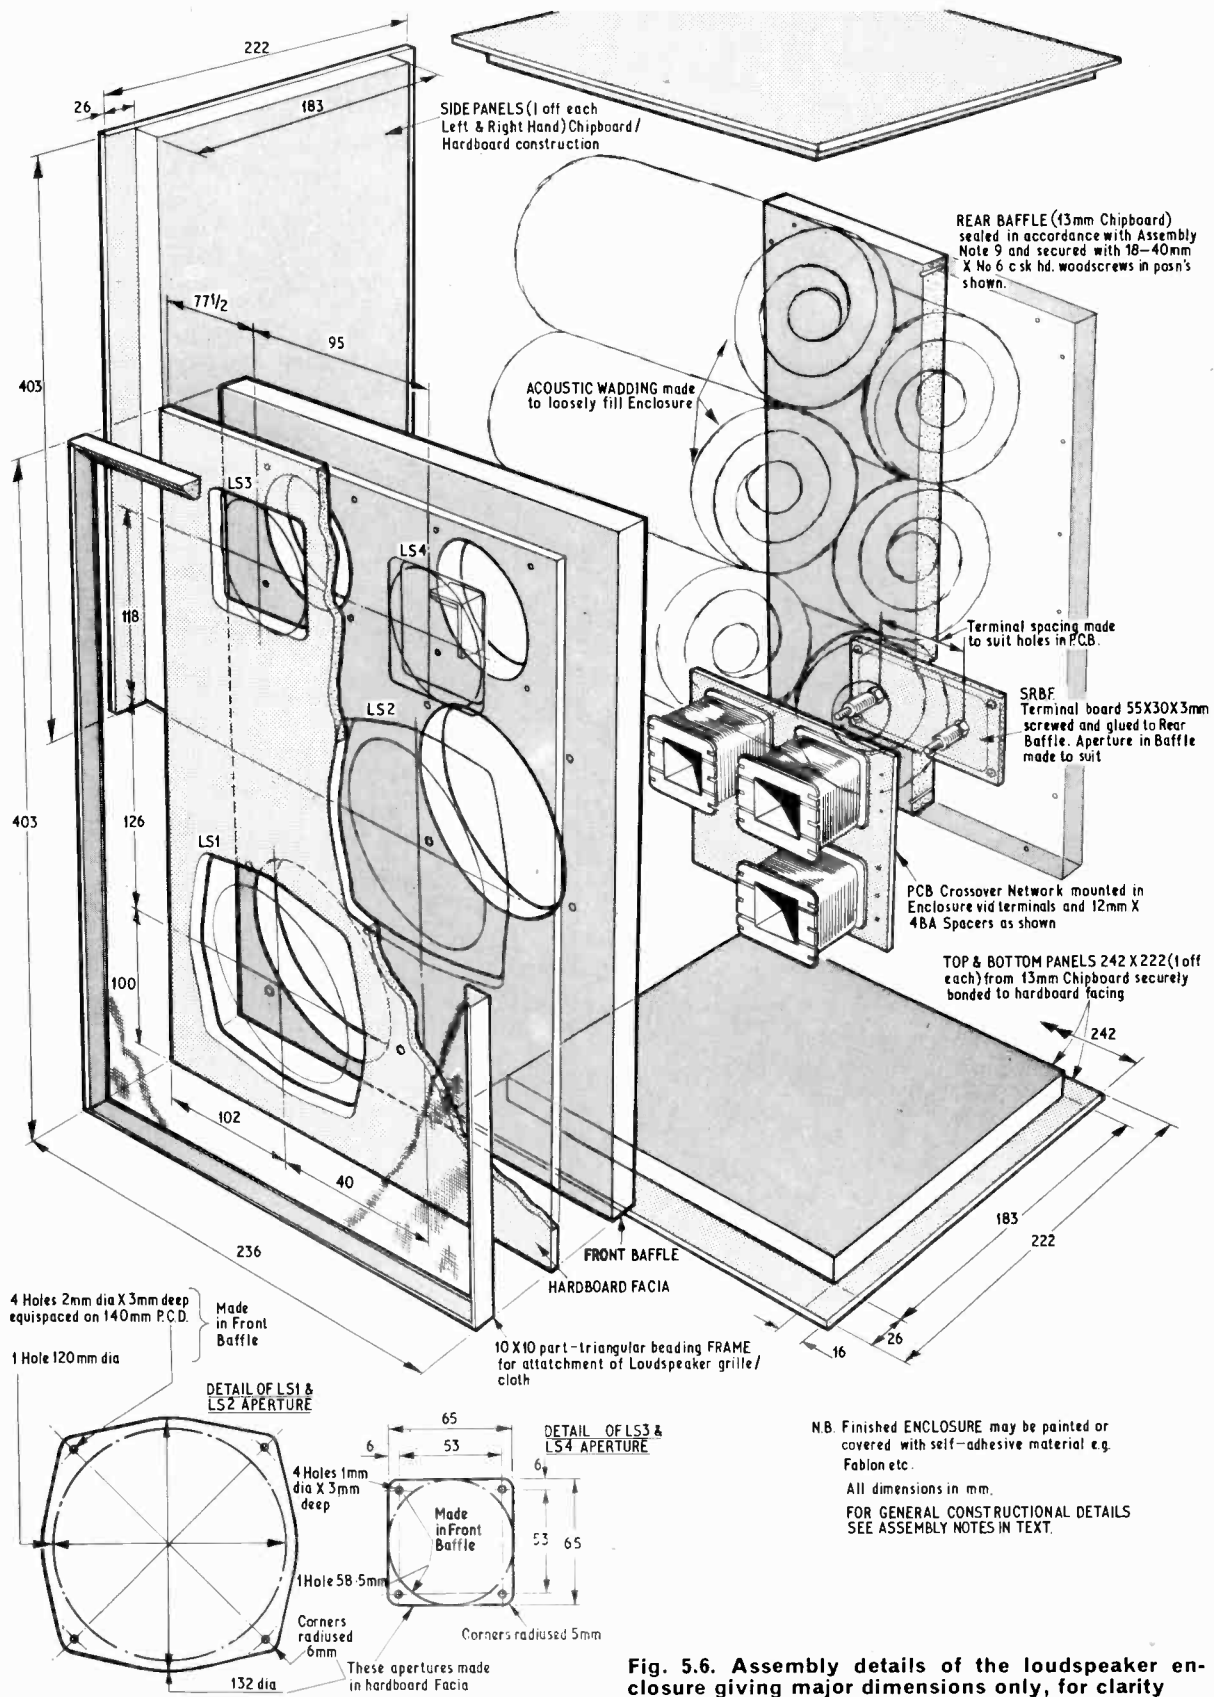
Assembly details of the loudspeaker enclosure giving major dimensions only, for clarity
